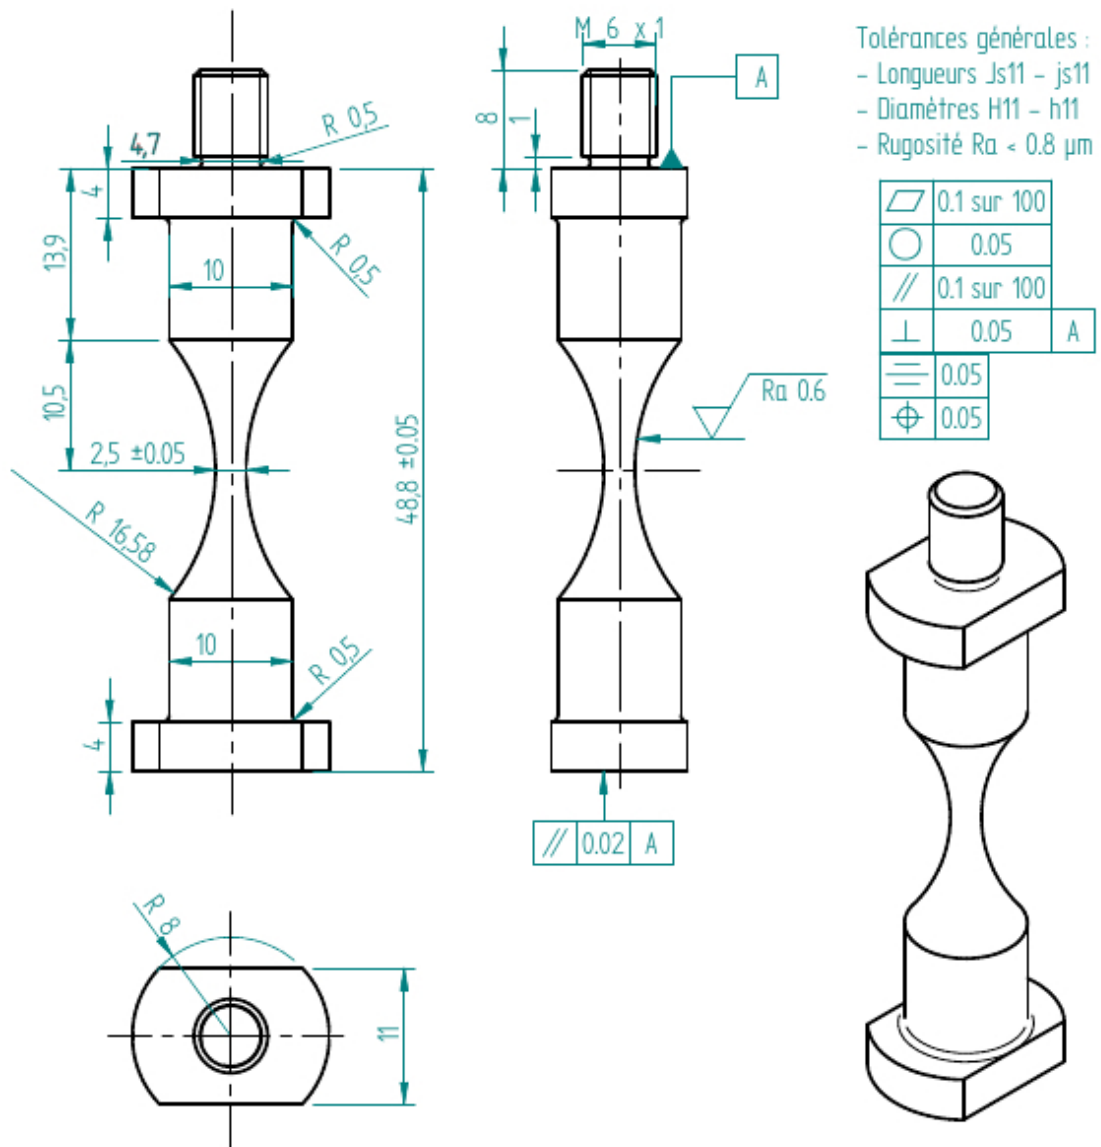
| Drawing of the ultrasonic fatigue specimen geometry designed for in-situ synchrotron micro-tomography fatigue tests carried out in the present study.
